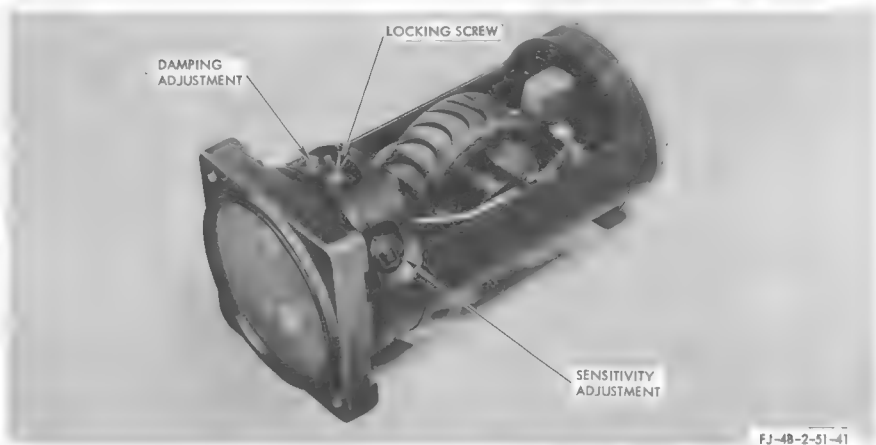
Turn-and-Bank Indicator Adjustment Screws
